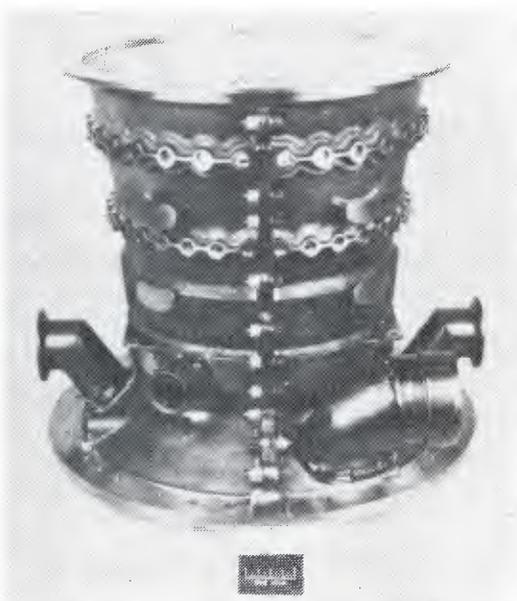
Finish Machined T700 Compressor Casing Made From Casting (Air Ducts Welded On)
